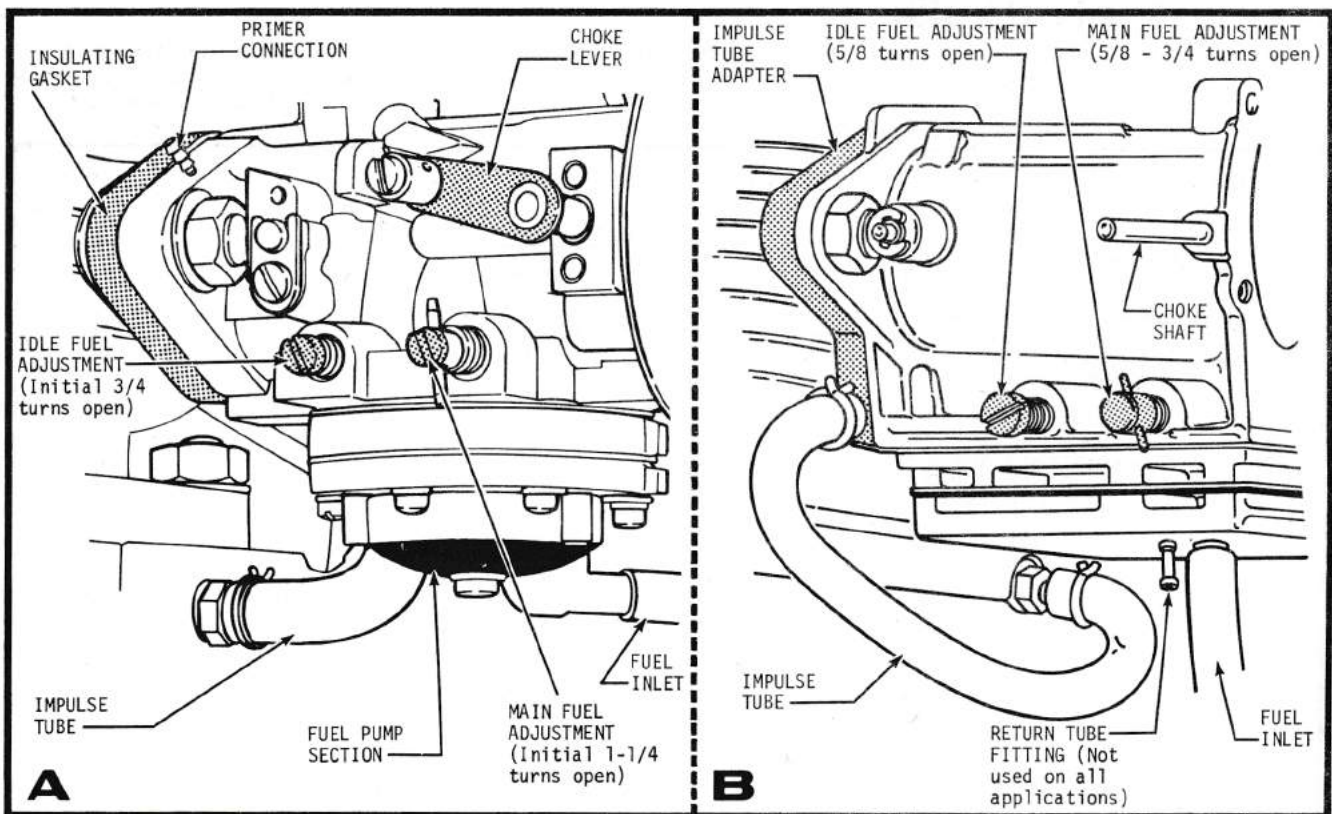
CARBURETOR ADJUSTMENTS (A) TILLOTSON (B) KOHLER CARBURETOR
